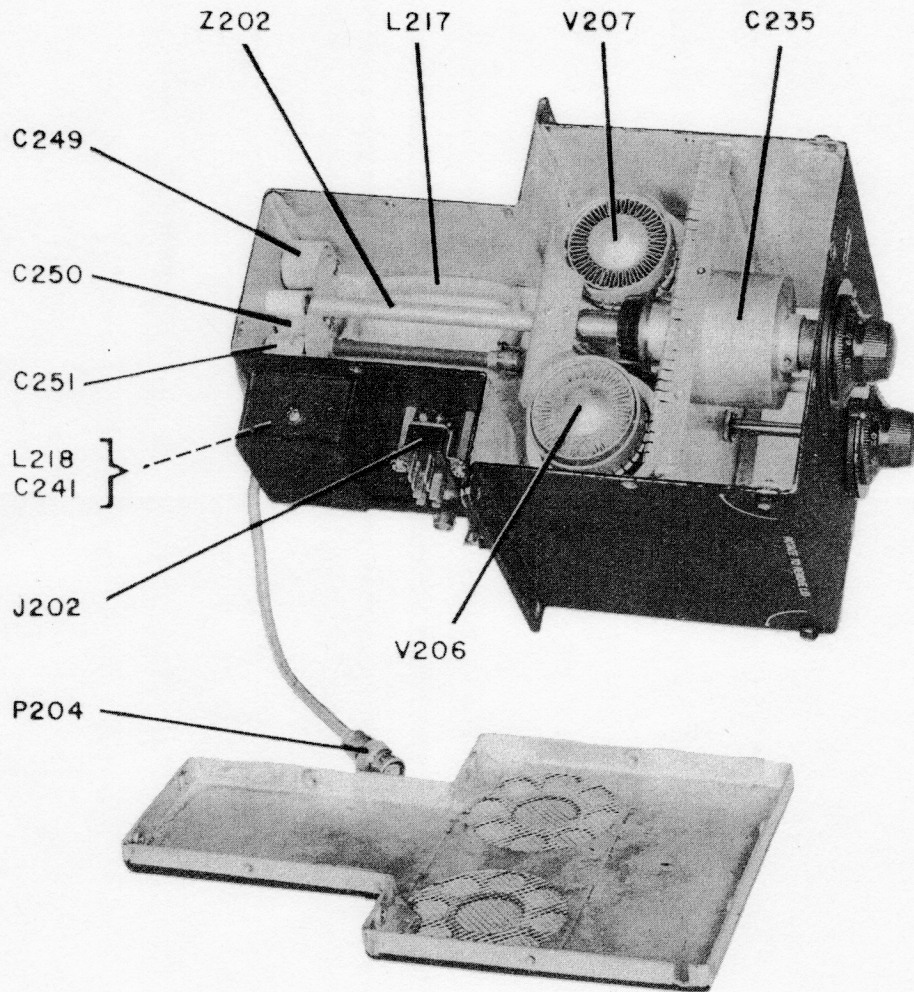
A. Power Amplifier Assembly, Plate Cover Removed
